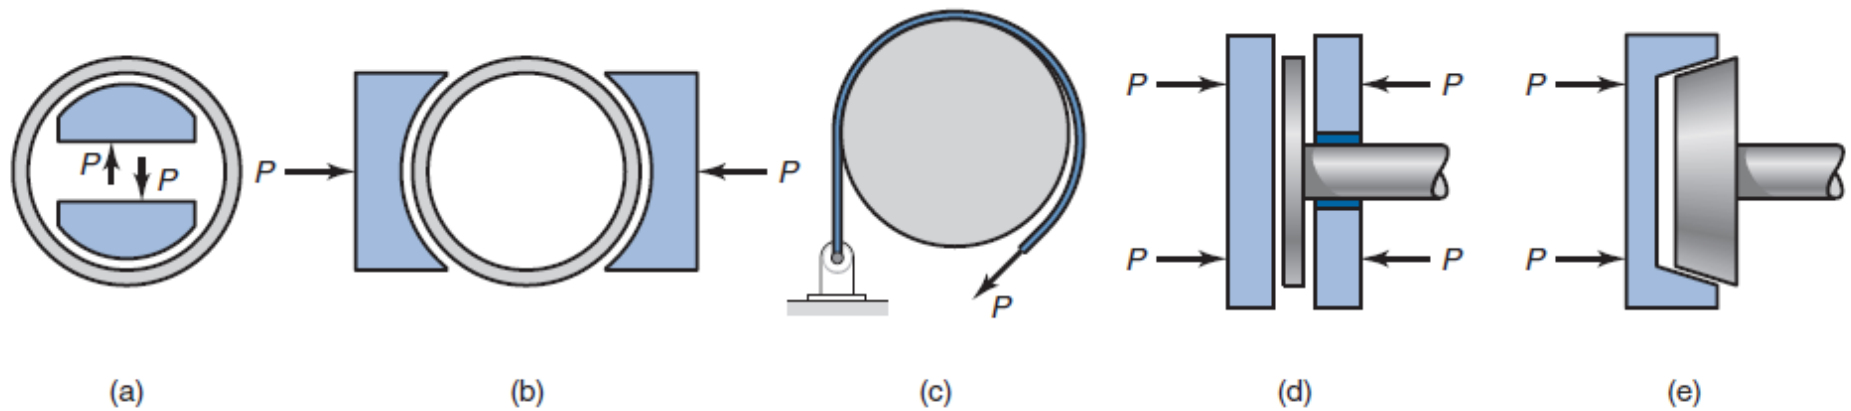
Types of brake and clutch. (a) Internal, expanding rim type; (b) external contracting rim type; (c) band brake; (d) thrust disk(clutch); (e) cone disk (clutch).
